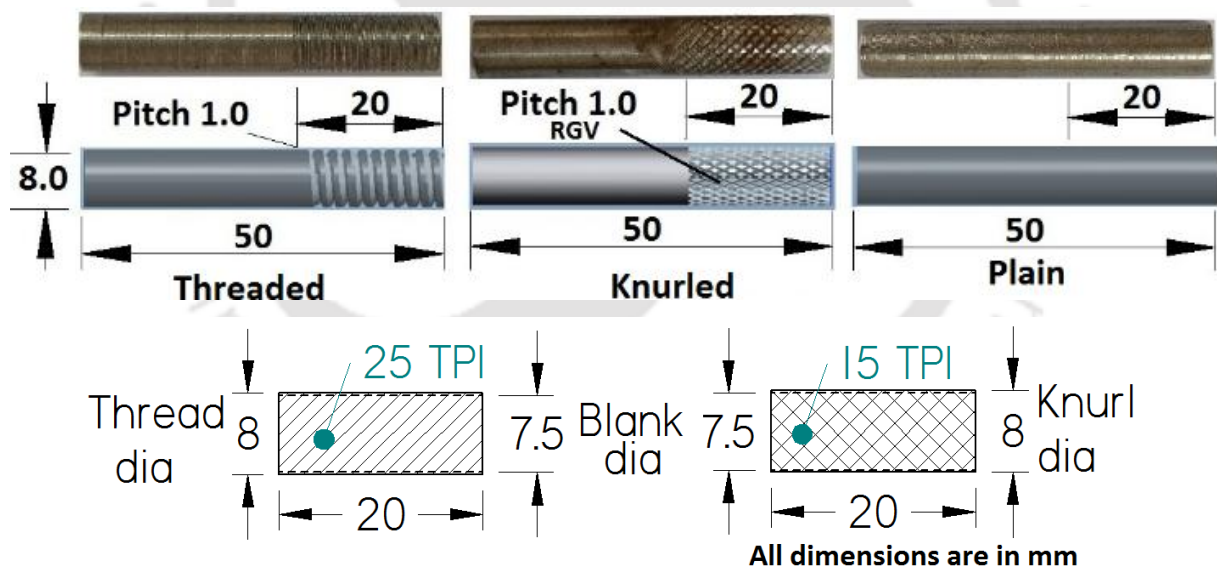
Actual image as well as the CAD model of the three types of profiles threaded, knurled & plain, and dimensions of the thread and knurls
